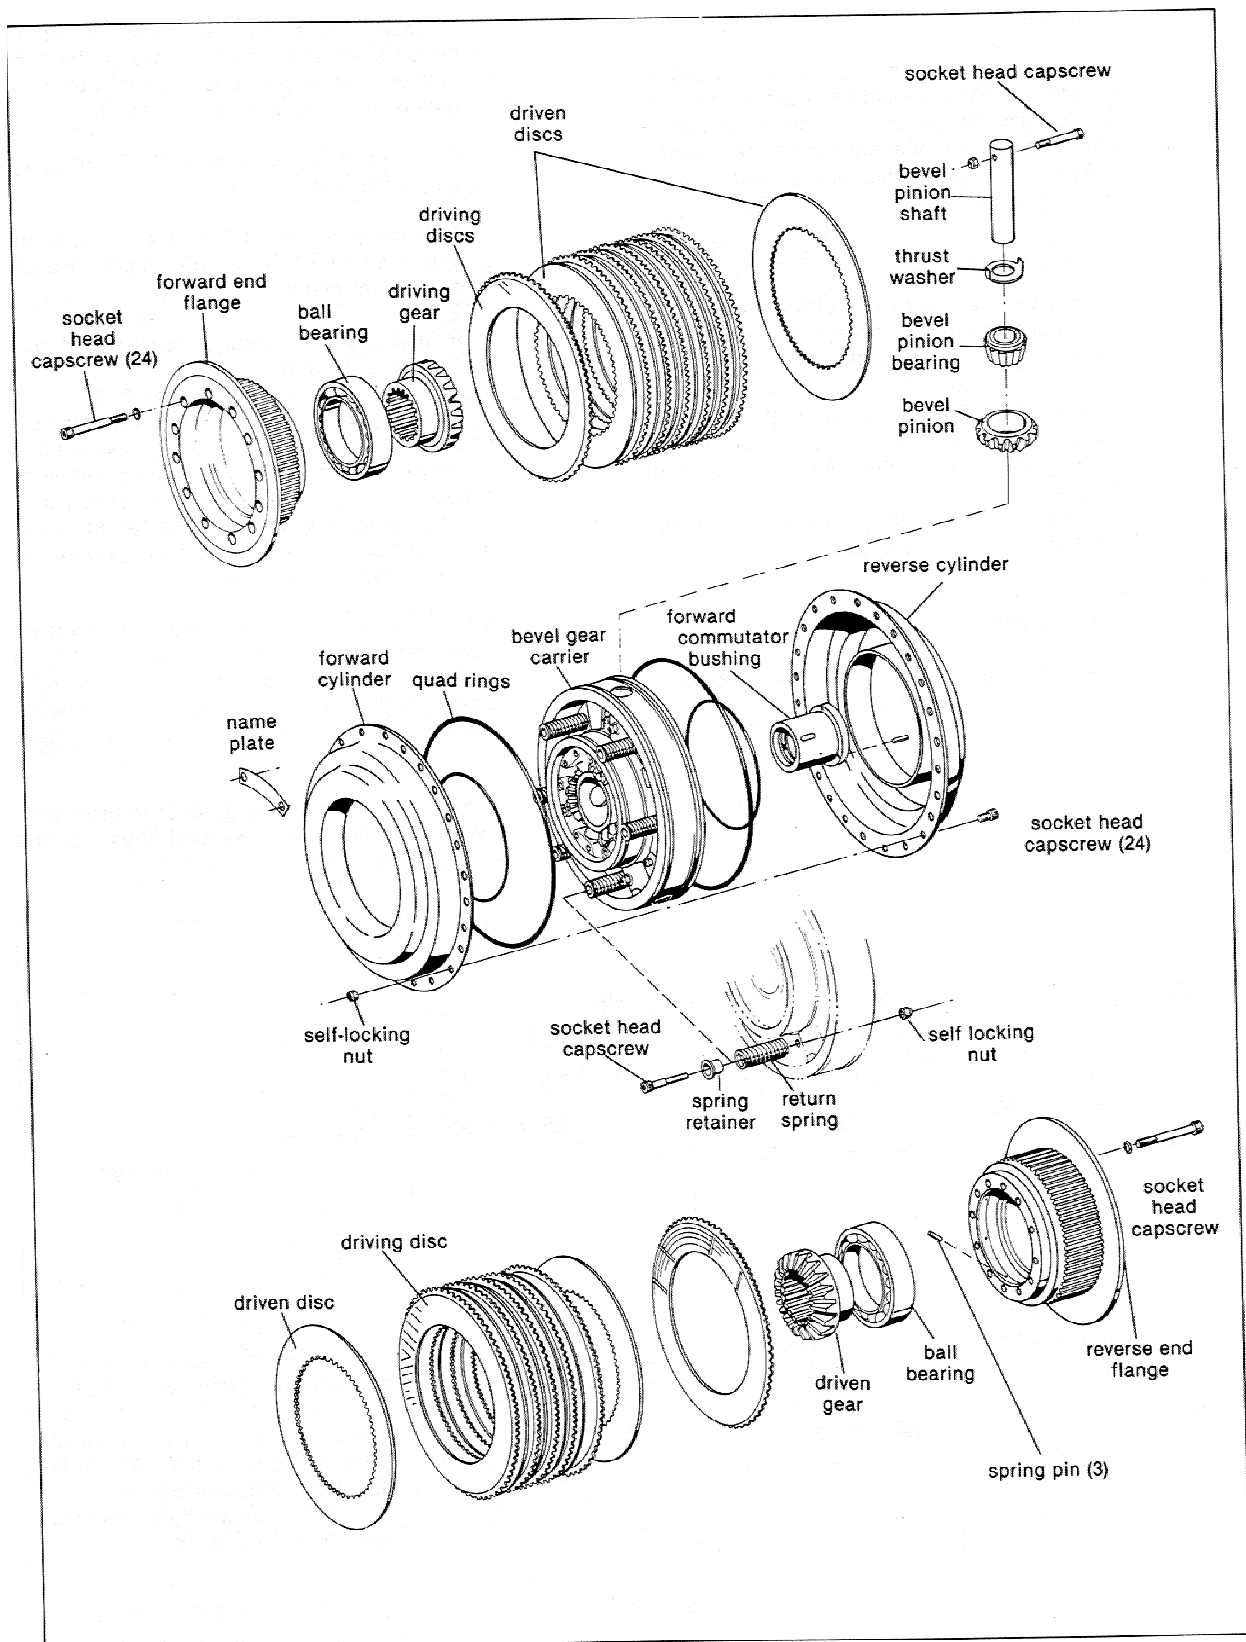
Clutch and Gear Carrier (HY-400 Clutch No. 1-00100-6000 Shown)
